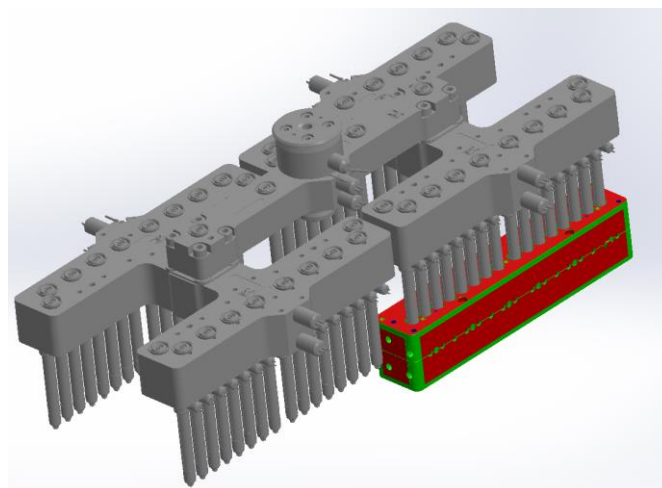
Carburetor used in a hot half of the mold, Muroplás courtesy.
